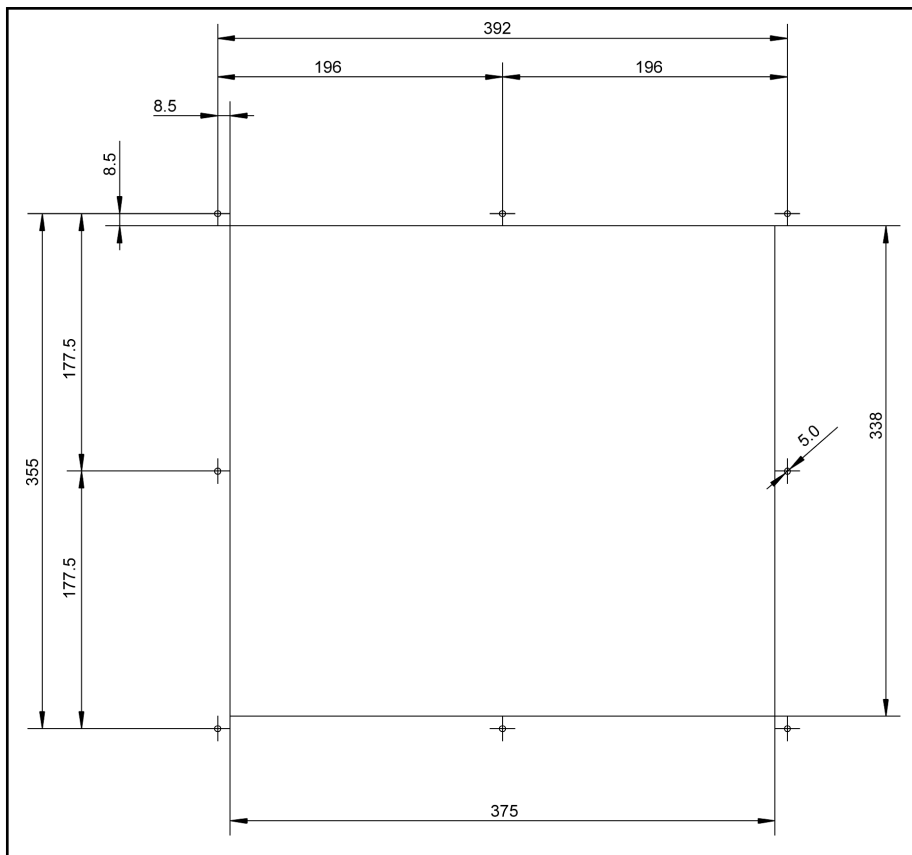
Mounting dimensions of the VDP 40.3 devices
